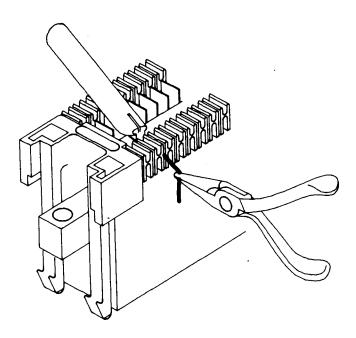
Removing Damaged Wire From 645042 Amp Connector
